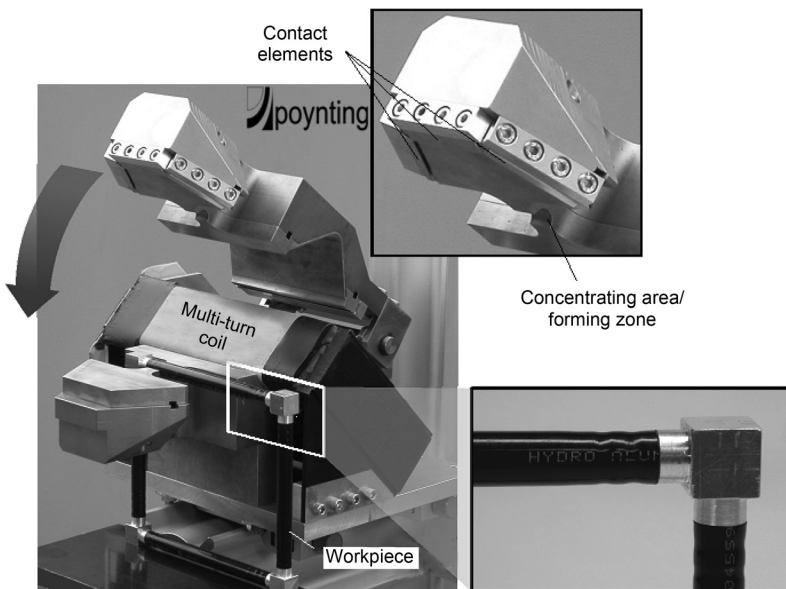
Example of a separable tool coil. Source: Ref 11.41
